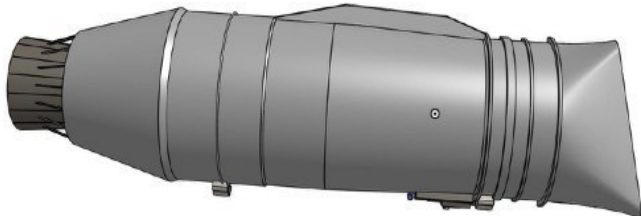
External side view of the LBPT engine showing the outer casing, intake and nozzle.
